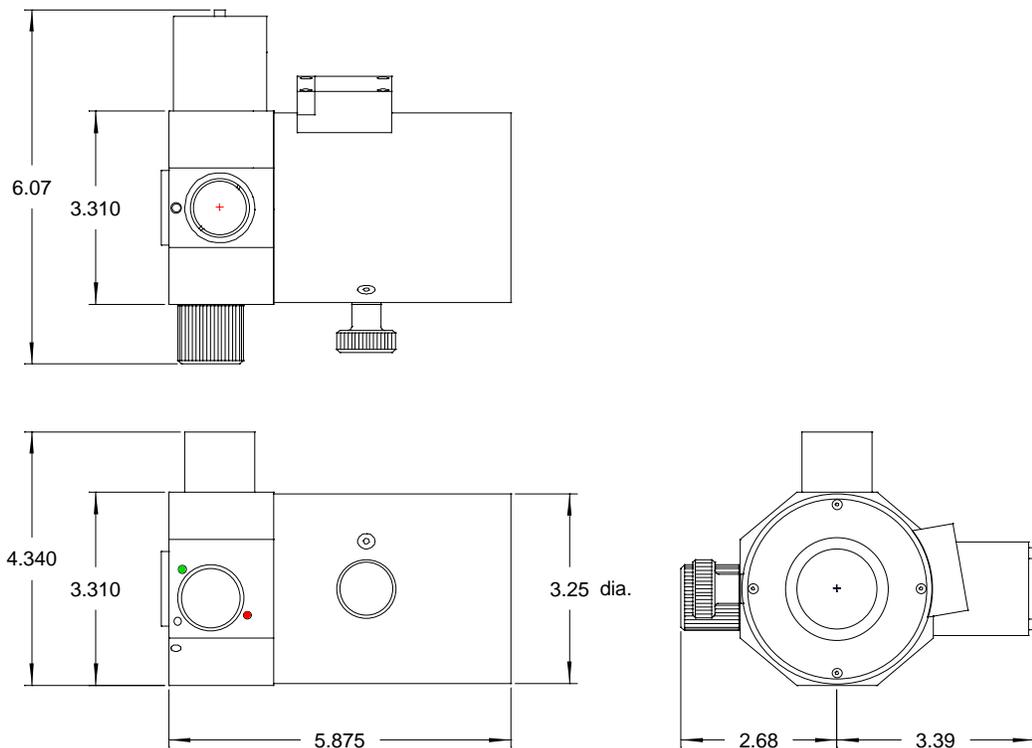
Engineering drawings of the housing assembly for the scanner optics.
